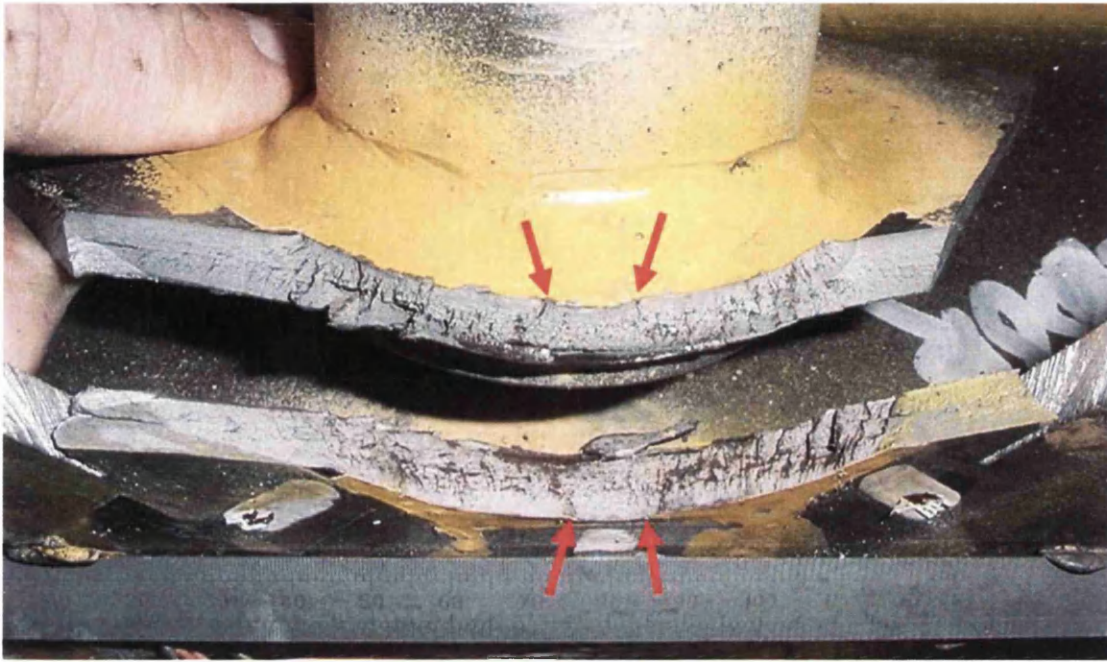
Test component sample 1 - boss outside weld toe failure upon removal at 1,052,840 cycles
